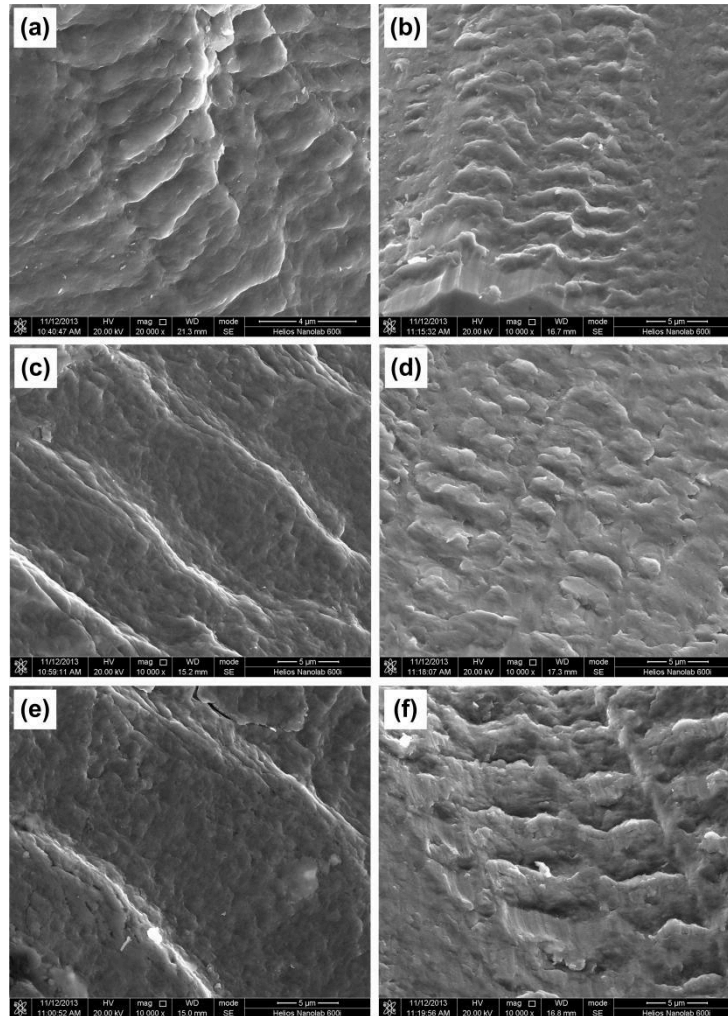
Fatigue fracture morphology of: the low speed crack growth regime of (a) Base metal and (b) Integral welded joint, the medium speed crack growth regime of (c) Base metal and (d) Integral welded joint, the high speed crack growth regime of (e) Base metal and (f) Integral welded joint.
